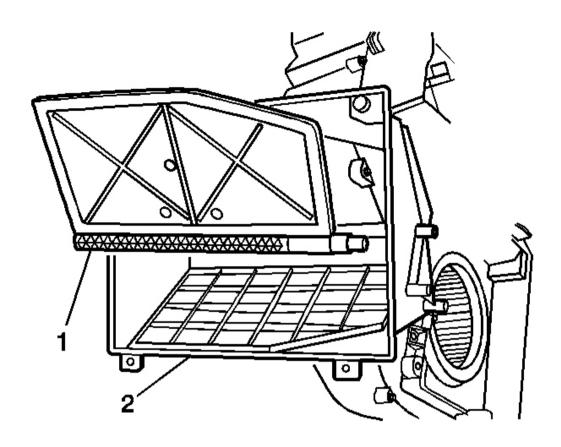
Recirculation Door & Recirculation Housing Courtesy of GENERAL MOTORS CORP.
